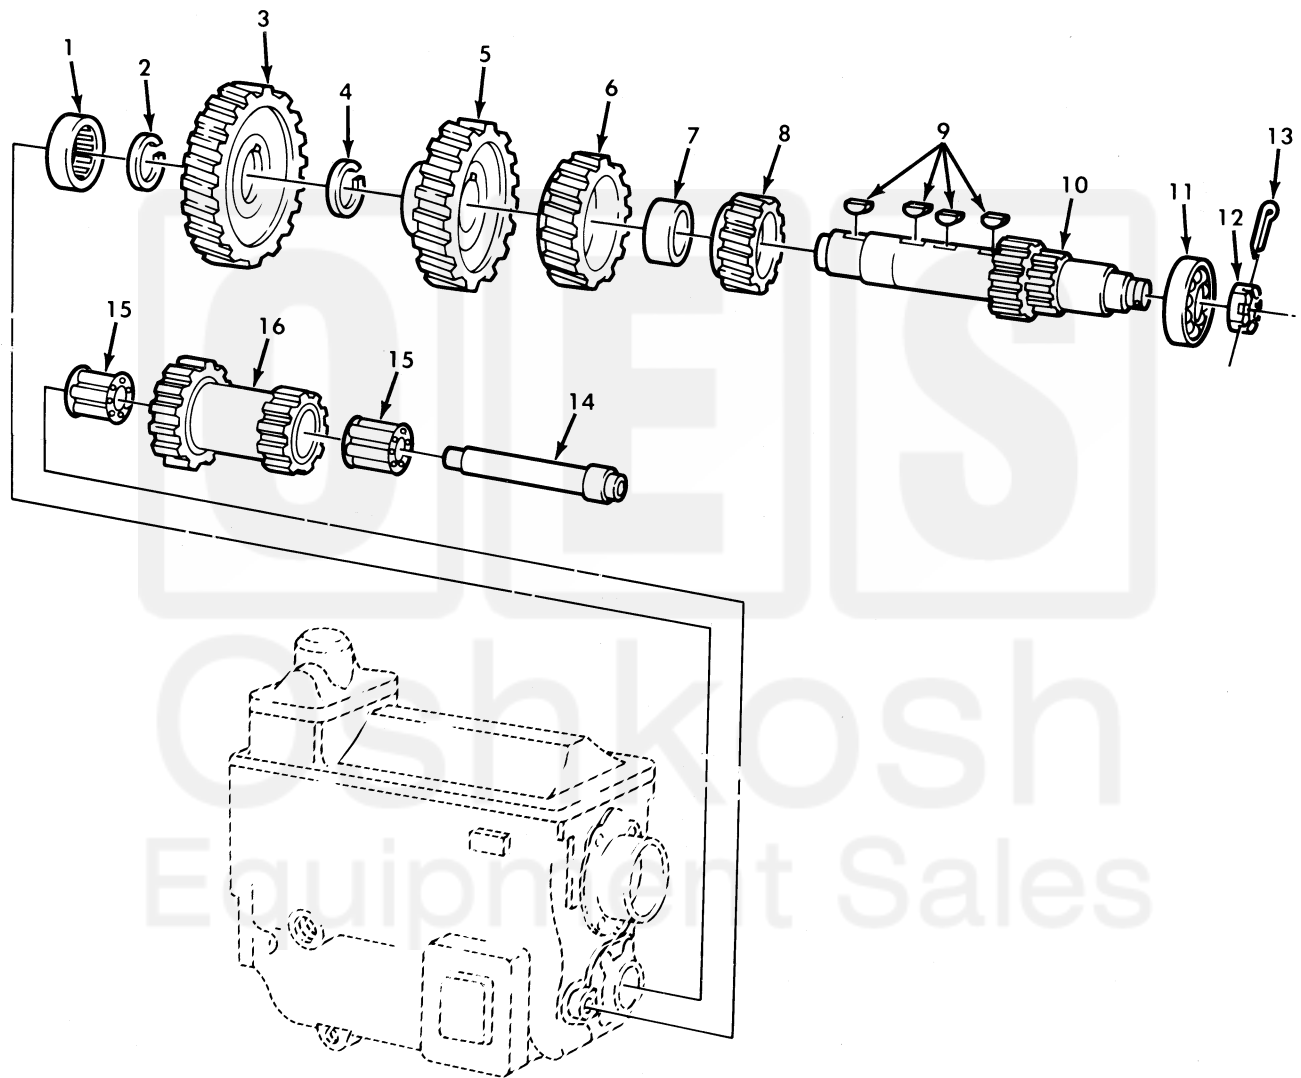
Transmission Countershaft, Idler Shaft, and Gears.
